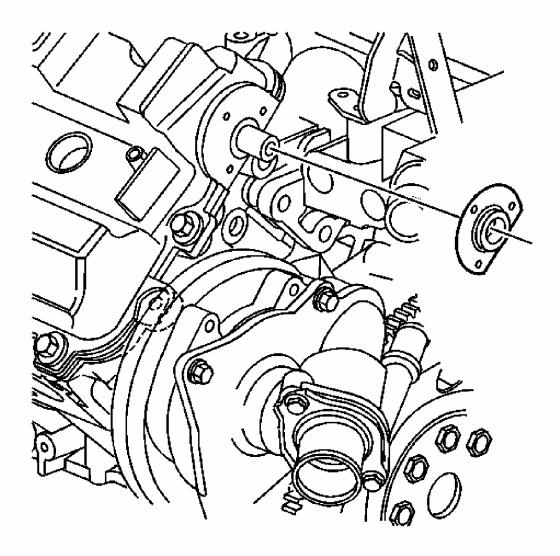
View Of Camshaft Seal Courtesy of GENERAL MOTORS CORP.
